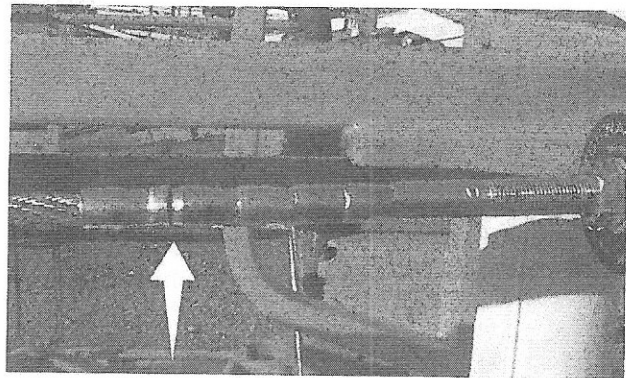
Slip Indicator - System OK (Transfastener Type only)
